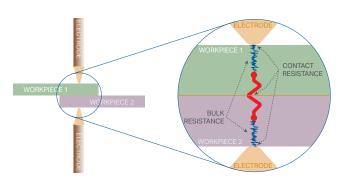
A typical (industrial) welding configuration on the left and a close-up zoom of the weld showing the electrical resistances that are used to create the weld spot.
